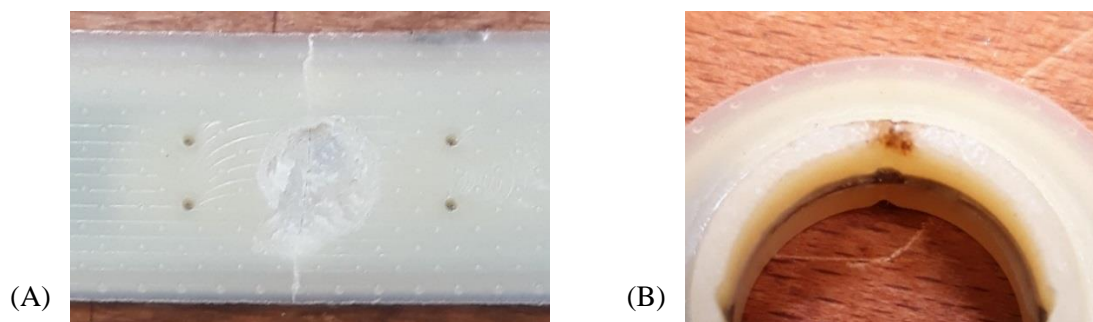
(A) Cracks on the polymer and (B) diesel defect on the polymer bearing
